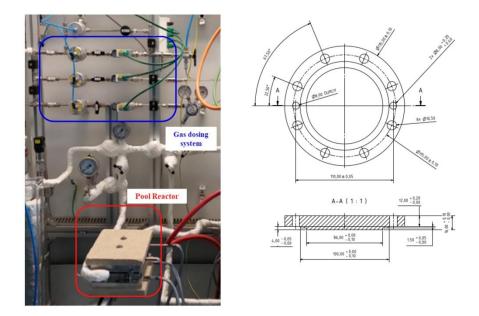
Photograph of the pool reactor housing shown in a), while the technical drawing of the pool housing is shown in b).
